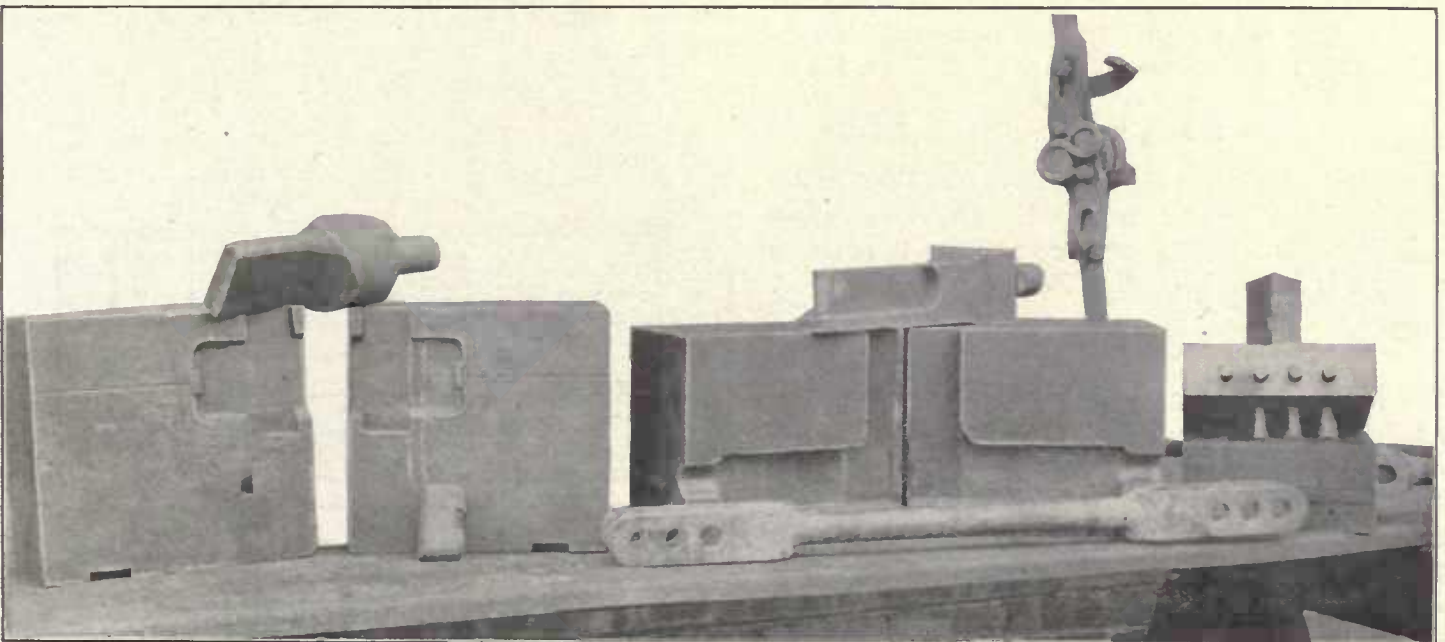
Dies for Forming Spring Hanger Gibs, Welding Bottom Brake Rods, and Punching Them, and a Device for Bending S-Hooks.
